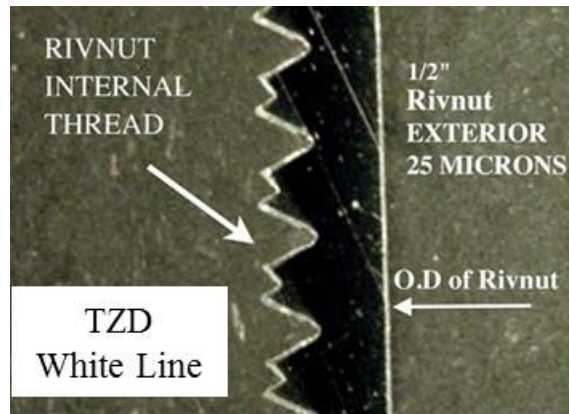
Example of how TZD coating maintains the original geometry. Cross section of the nut shows that the internal threads are coated and maintain the thread geometry with a 25-micron coating (bright surface).
